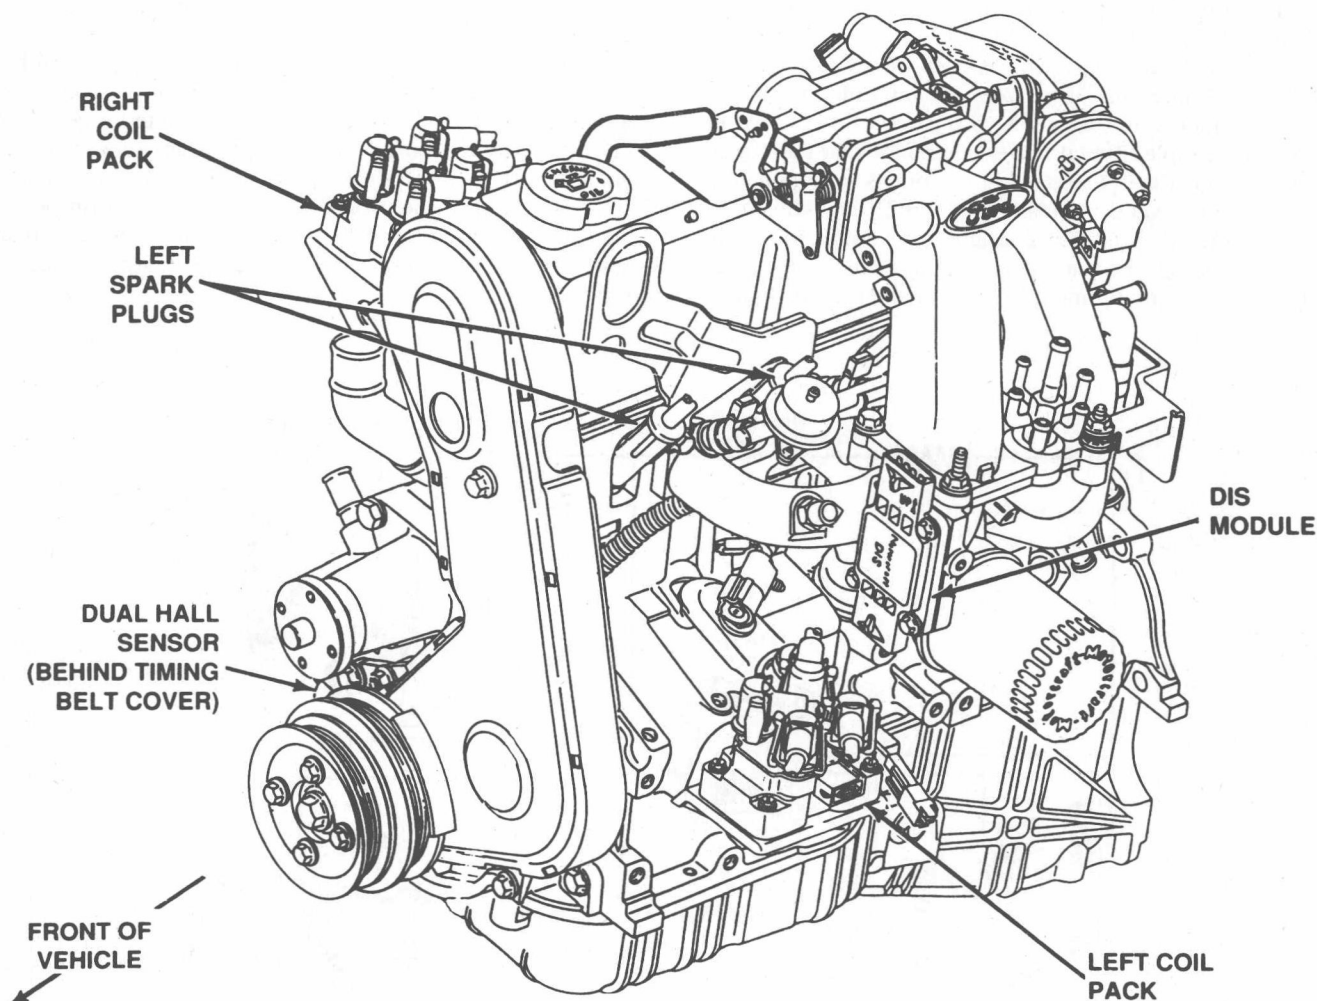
Components of a distributorless ignition system. (Ford Motor Company)
